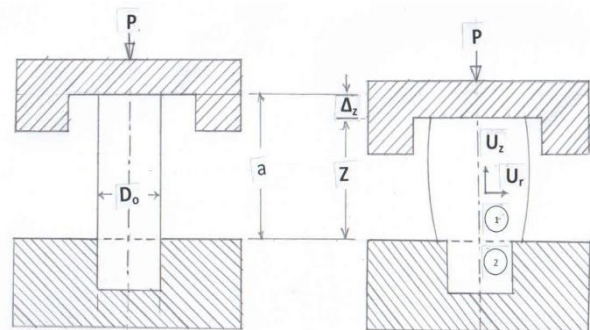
Cylindrical porous composite specimen in rivet shape heading process
